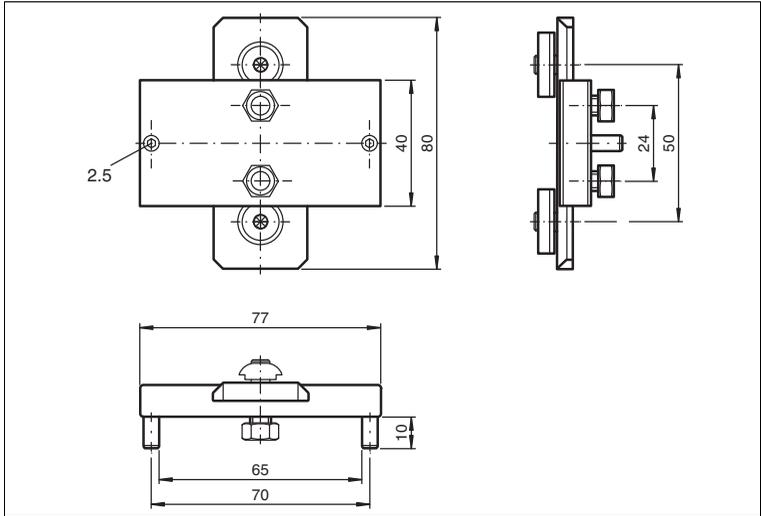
Dimensional drawing of mounting aid OMH-SLCT-11
